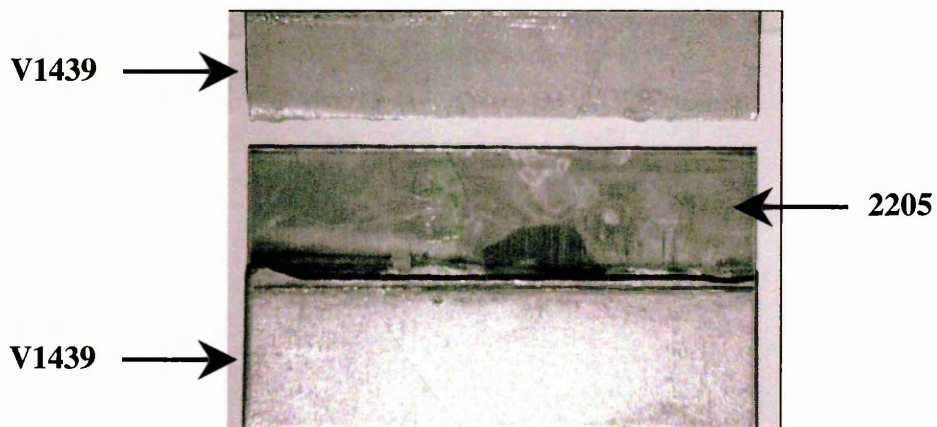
Shows a fatigue specimen in which fatigue failure occurred in the V1439
